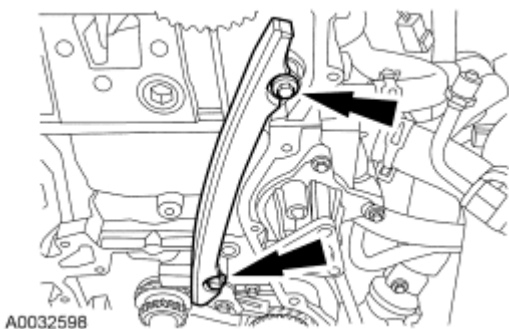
Identifying Bolts And LH Timing Chain Guide
